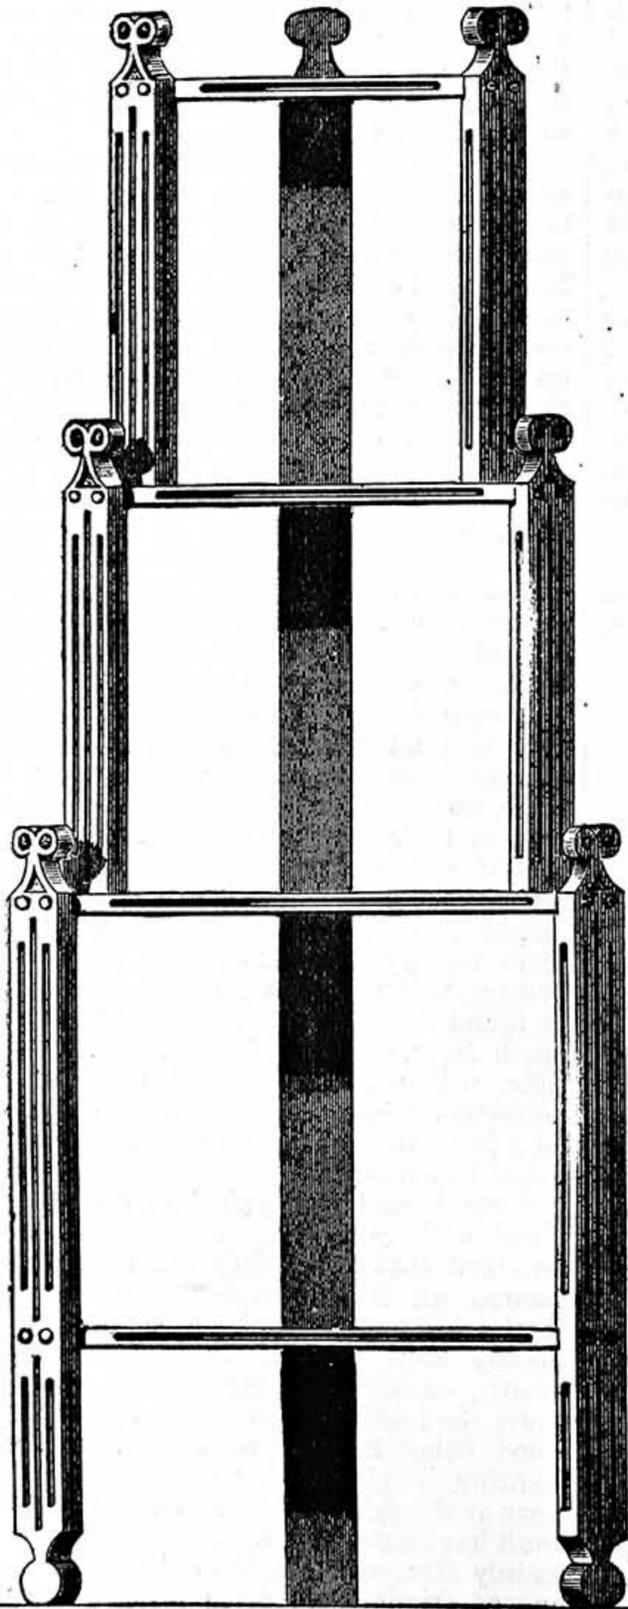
Front Elevation of Whatnot on 1 1/2 in. scale.
